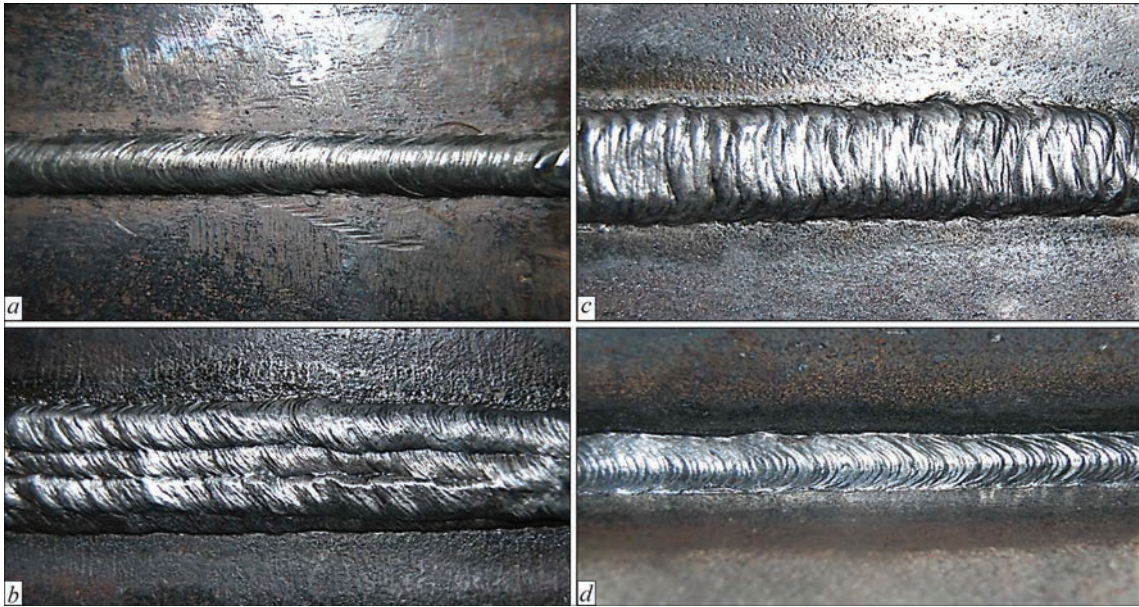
Appearance of butt (*a–c*) and fillet (*d*) welds in spatial positions: *a* — flat; *b* — horizontal; *c* — overhead; *d* — horizontal overhead
